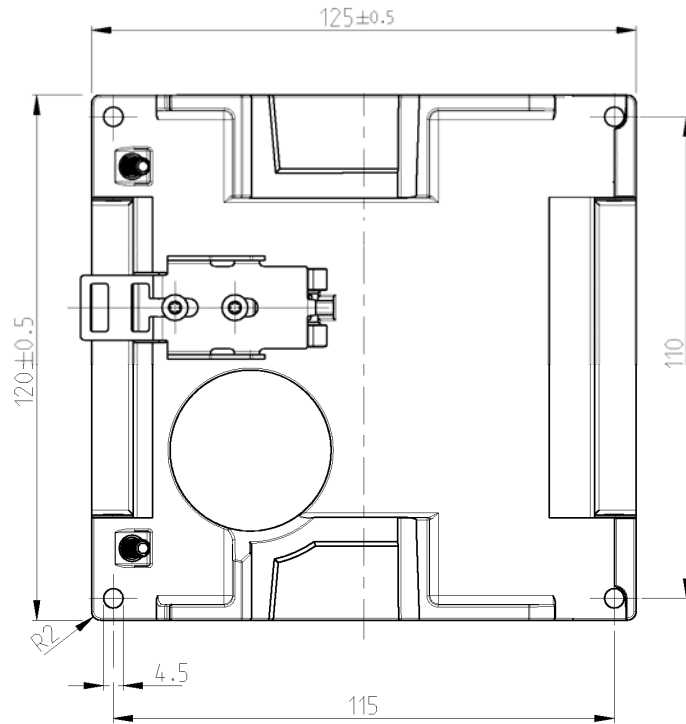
Dimension drawing rear view of the SCALANCE X116, X112-2
